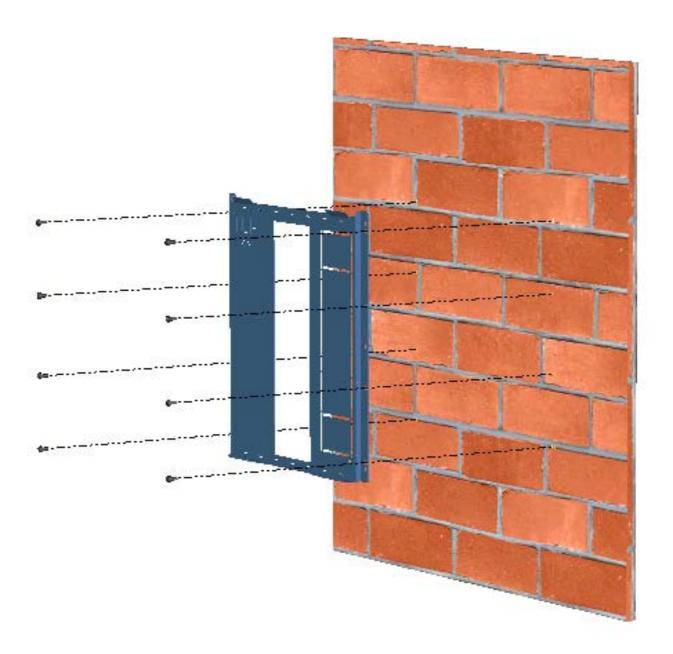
Wall Mounting A Wall Mount Dimmer
